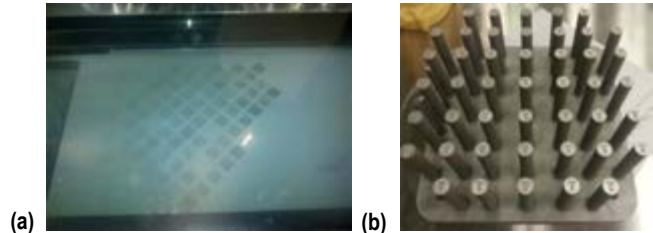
Inconel 625 samples: (a) Samples being built and (b) completed samples ready for testing.
